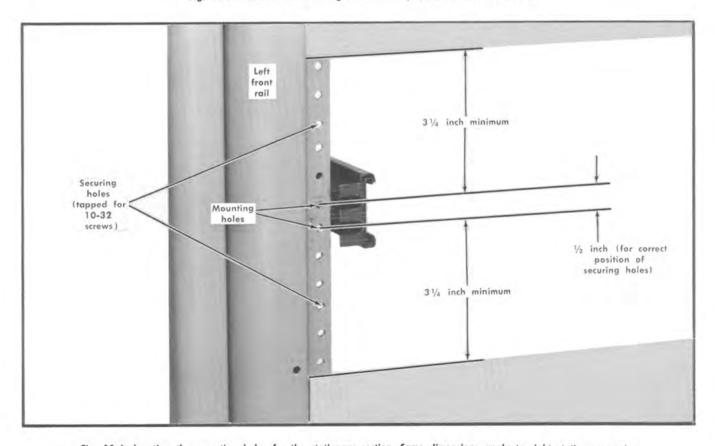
Locating the mounting holes for the stationary section. Same dimensions apply to right stationary section.
